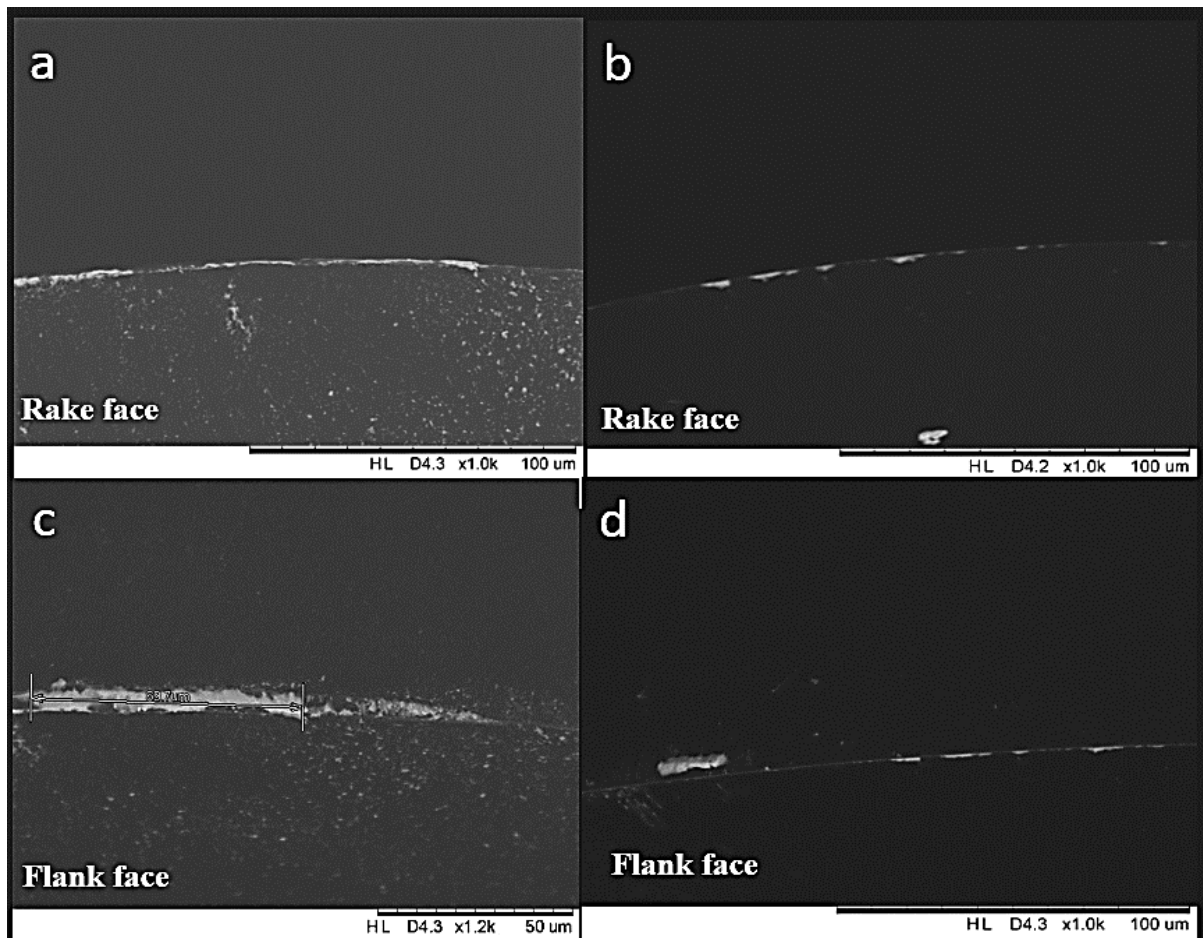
SEM images of the tool: (a) tool rake face in CDT, (b) tool rake face in MFDT, (c) tool flank face in CDT, and (d) tool flank face in MFDT.
